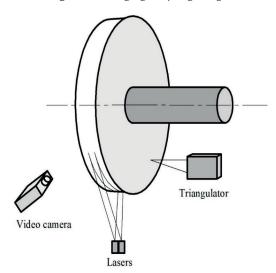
Measuring the wheel diameter and the distance between the inner edges
